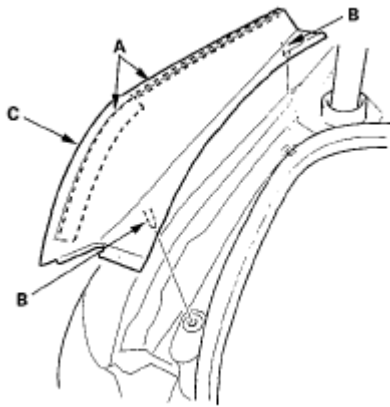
Identifying Double-Sided Adhesive Tape, Pins And Trunk Opening Panel
